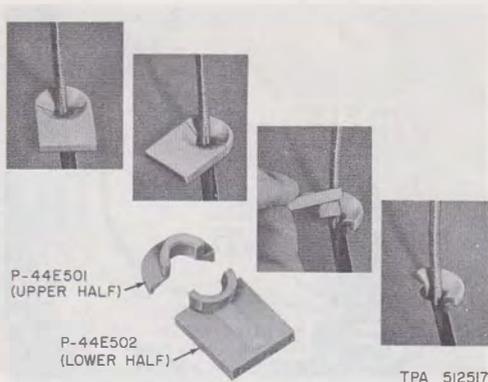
P-90D061 Polarity Guard Assembly Installed
